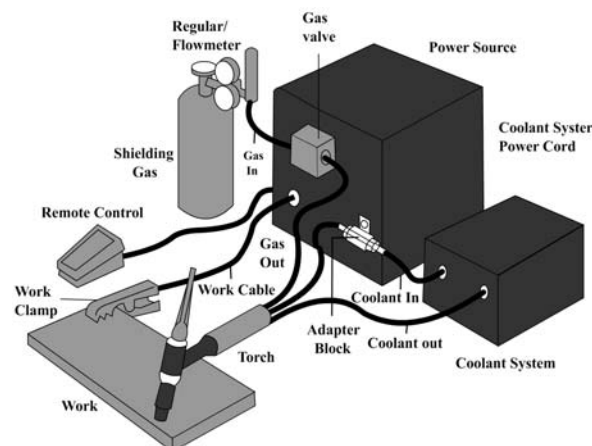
Details of components of GTAW system [Millerweld.com]
